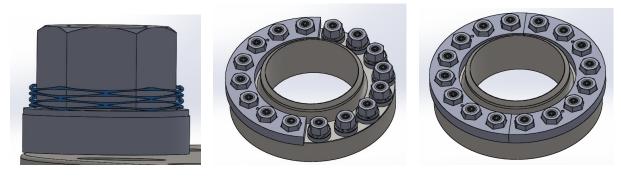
Spring over washer and nut Figure 17: Semicircle belt Figure 18: Nut retainment system assembly
